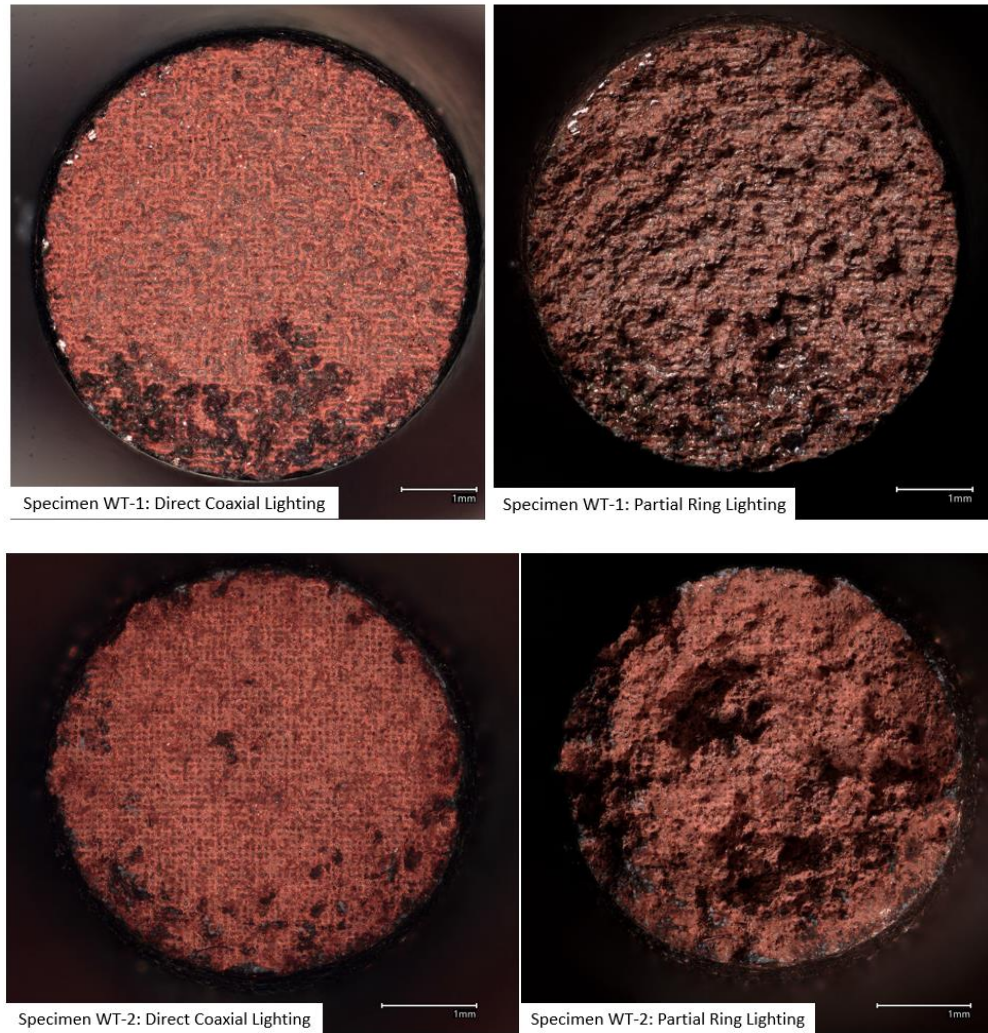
Visible differences in fracture surface between prematurely-failed specimen WT-1 and typical specimen WT-2.
